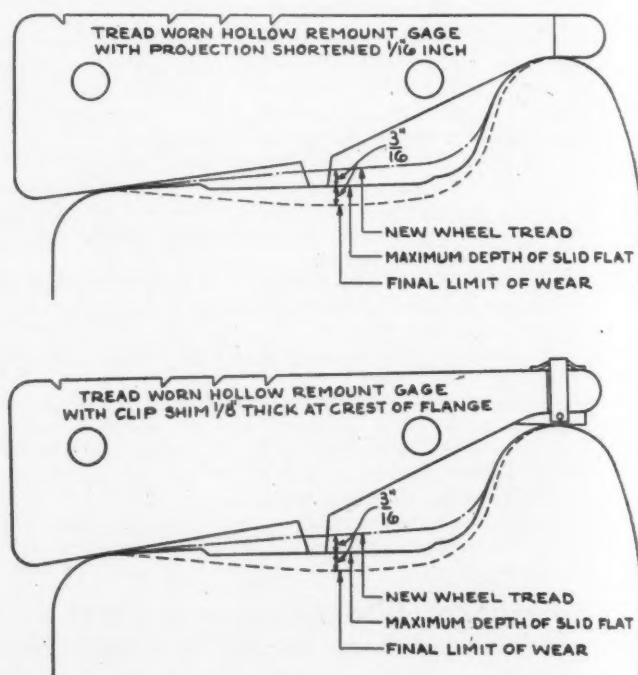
Gages for checking slid-flat cast-iron wheels for grinding
